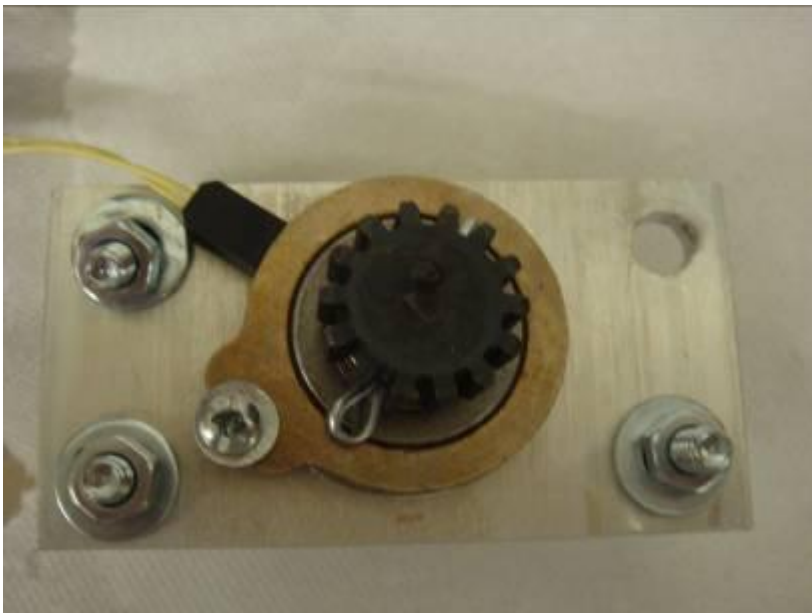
Top view of clutch showing pin through shaft (under gear) and bolt connecting clutch to the bracket
